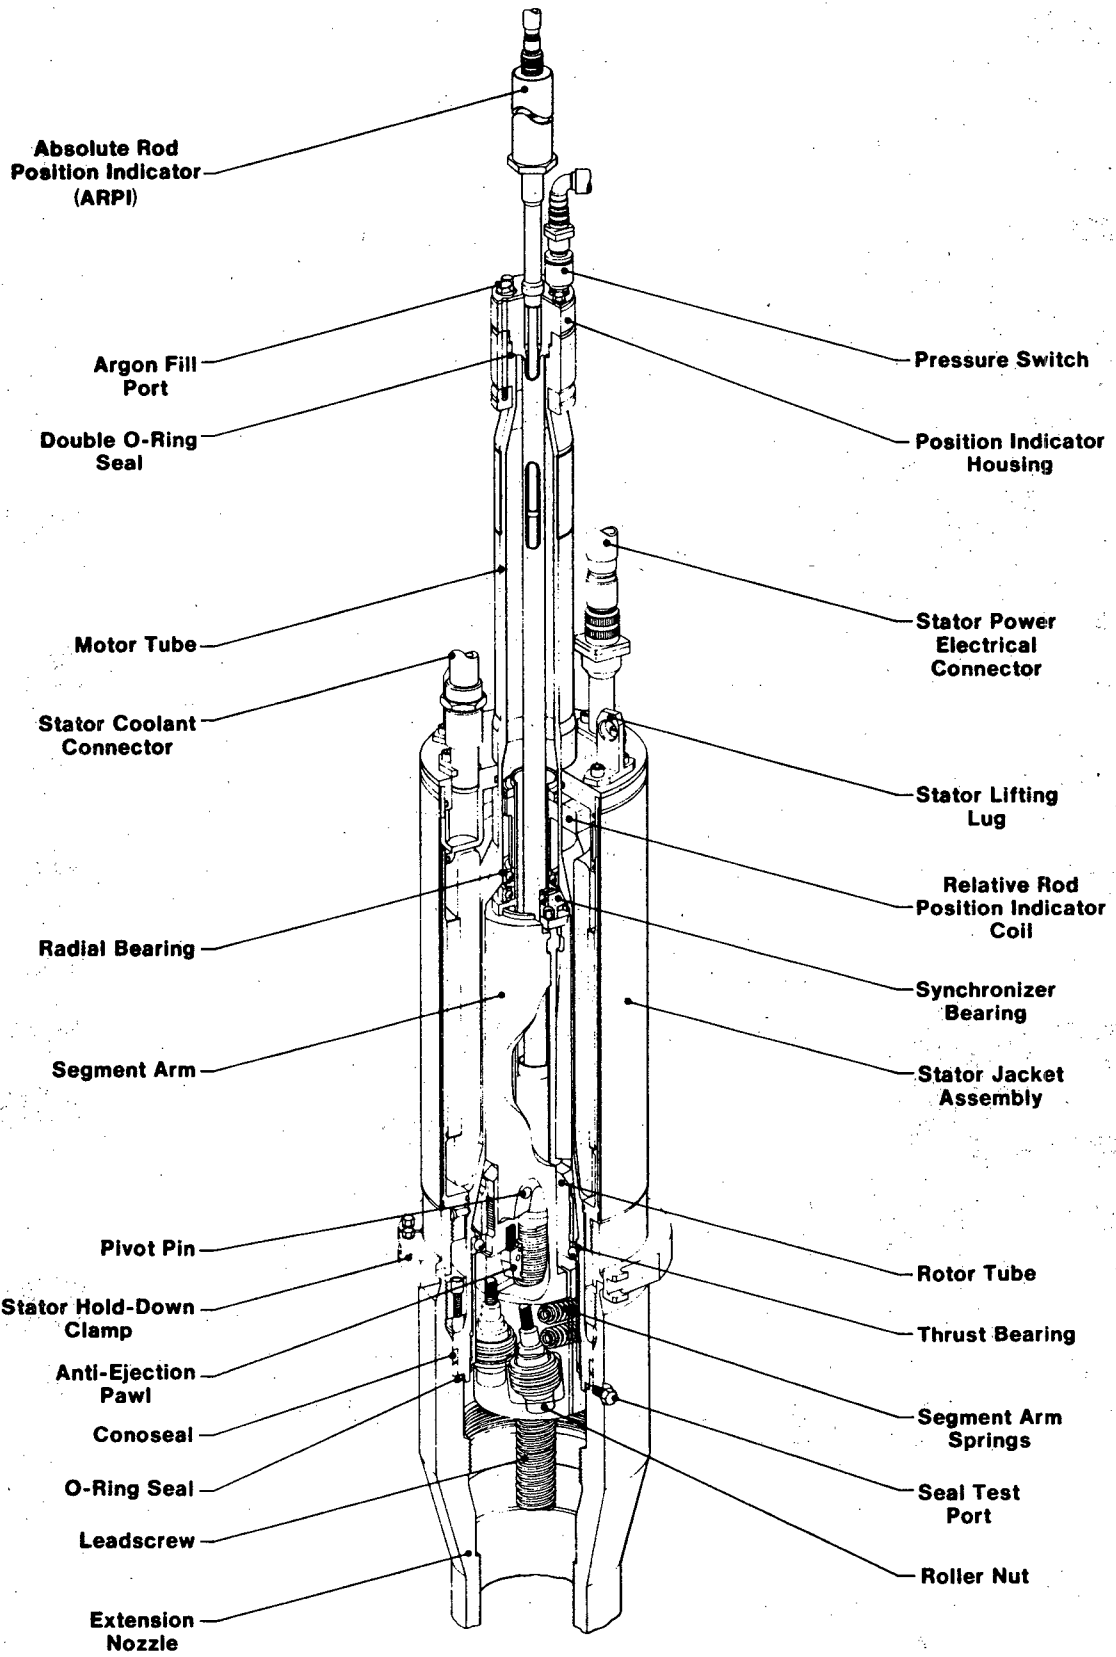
Primary Control Rod Drive Mechanism (PCRD) - Upper CRDM Assembly and Extension Nozzle
